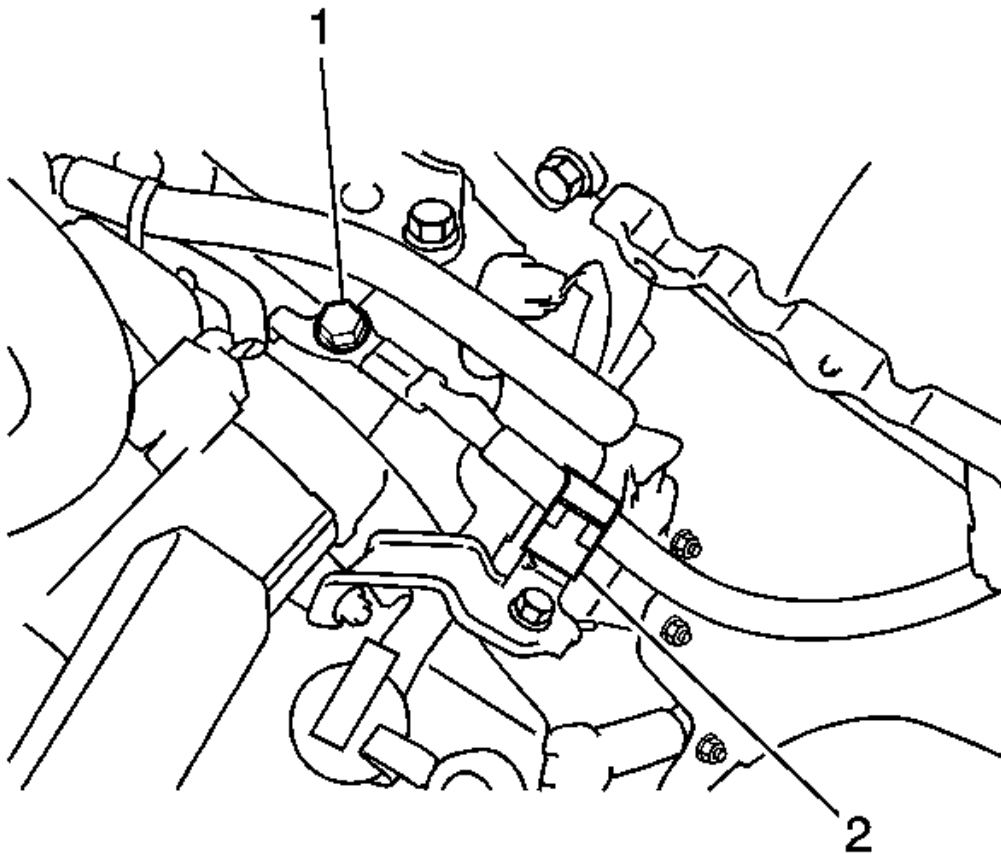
Identifying Clamp & Ground Cable - Automatic Transaxle
